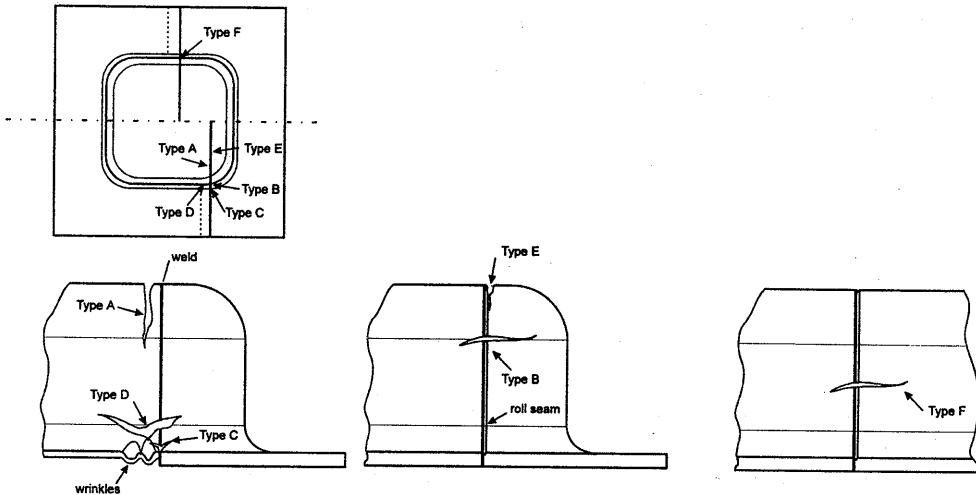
Typical failure types in deep drawing of welded sheets
